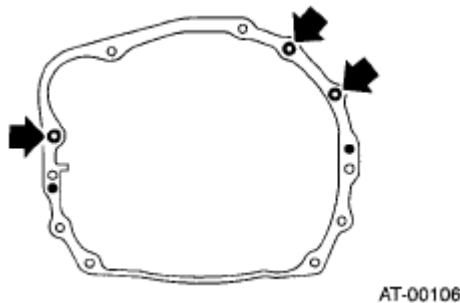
Locating Bolts Which Hold Upper Side Of Transmission To Engine - AT Model
